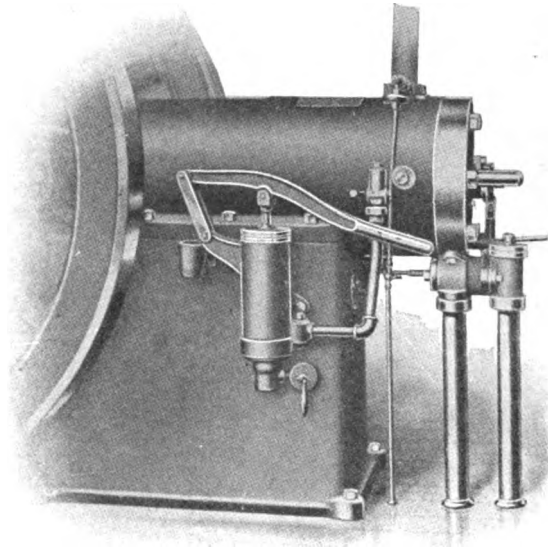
Starting Gear of the Fairbanks-Morse Engine.
